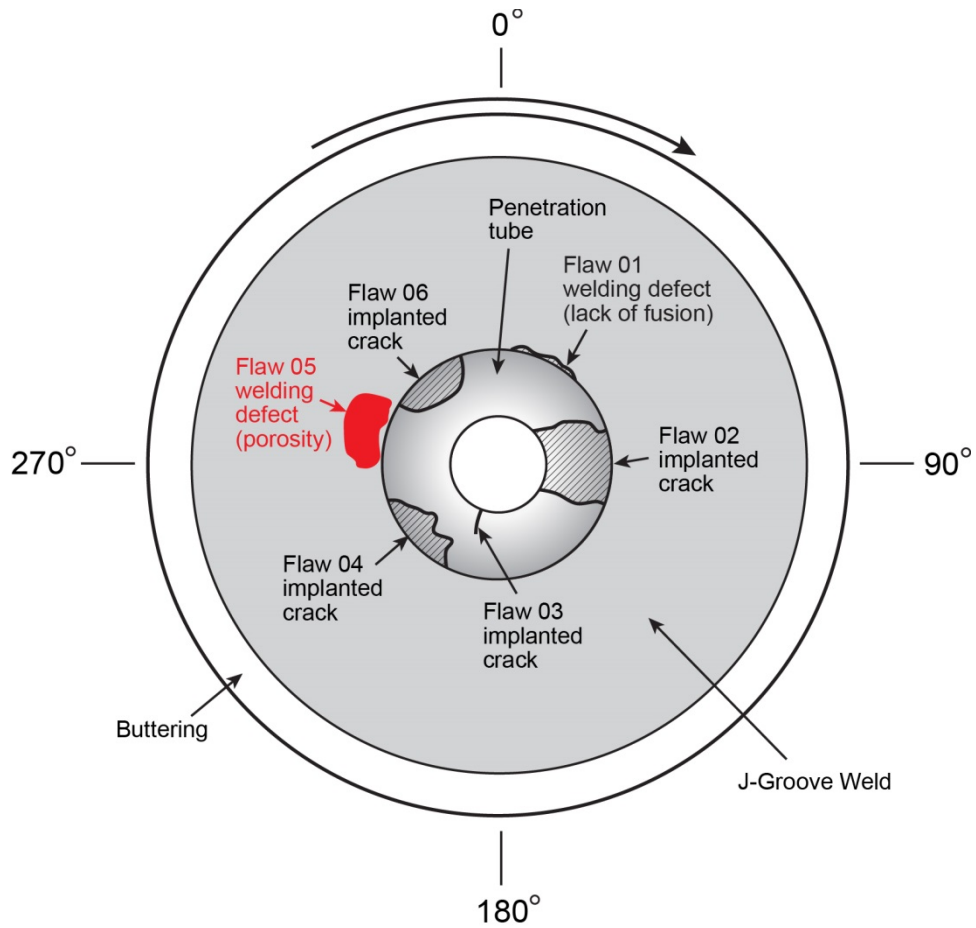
Top View Illustration of the True State Used for J-groove Weld Surface Testing of PINC Test Block 5.1 (PARENT Test Block P25) in PINC. The true state used in PINC is emphasized with red shading of Flaw 05.
